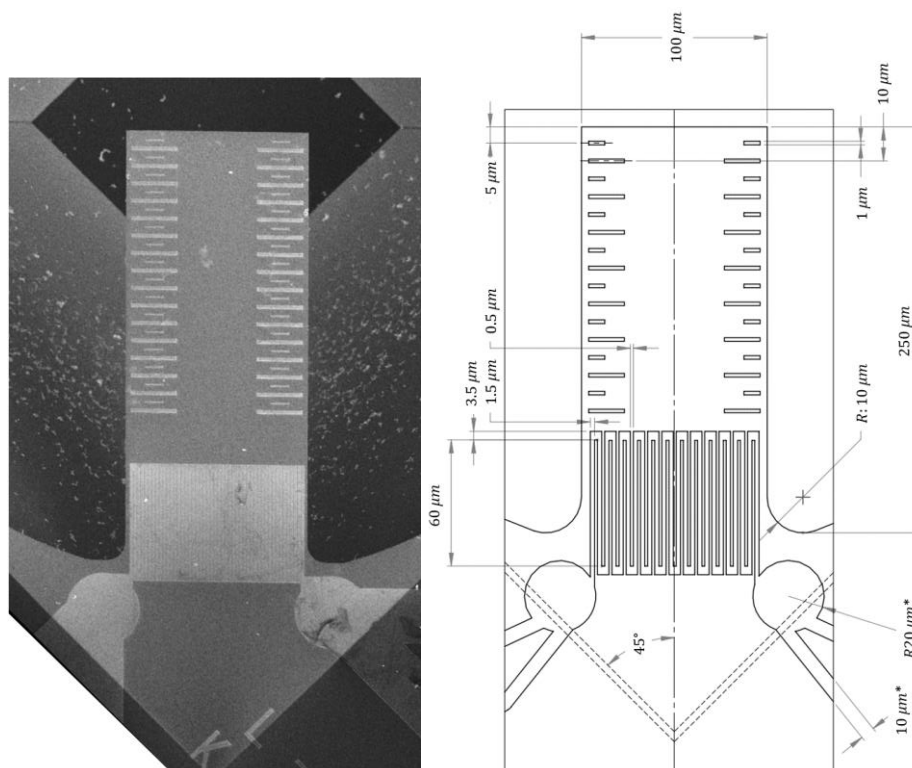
SEM picture (left) and CAD drawing (right) of the prototype MEMS device, highlighting cantilever structure and strained resistor dimensions.
